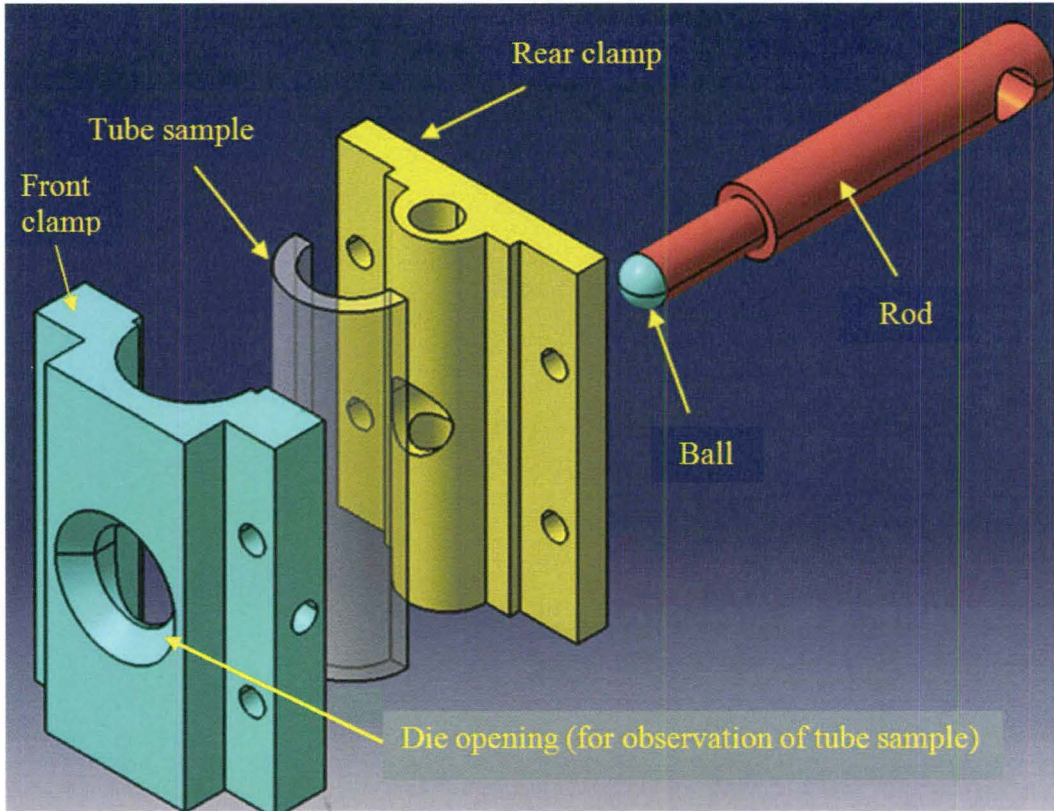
Tube sample insert between clamps in biaxial stretching ball test system.
